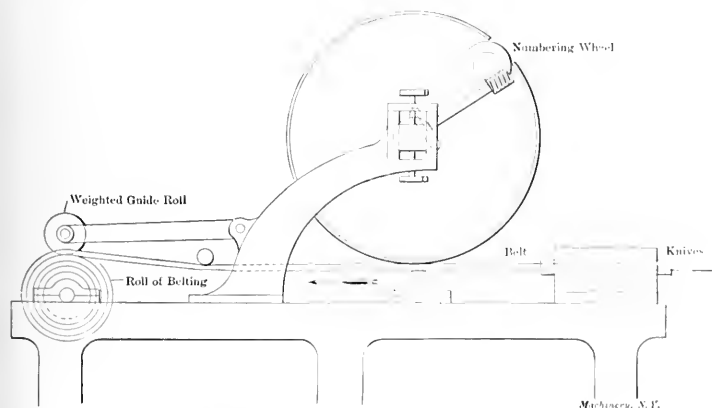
Diagram showing Mechanism of Finishing Machine.
